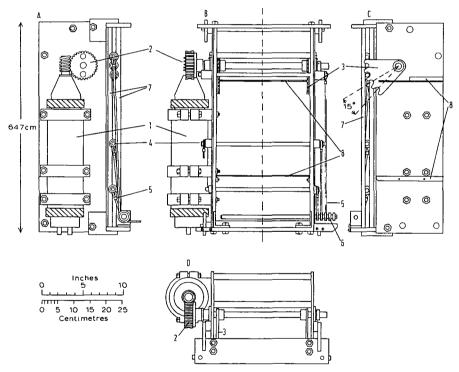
Scale drawing of the net-changing mechanism showing: (A) the left side view of electric motor mounted on frame, positions of sliding bars and attachments of elastic strops; (B) the rear view of the mechanism; (C) the inside view of the left side of the frame with metal fingers; (D) the top view of the motor and drive to release mechanism. (1) Electric motor; (2) geared drive to net supports (metal fingers); (3) net supports; (4) stainless steel sliding bars which carry the nets; (5) stainless steel cable which is linked to the elastic strops; (6) pulleys for stainless steel cables; (7) stainless steel round bars in which net supports slide; (8) ducting to net.
